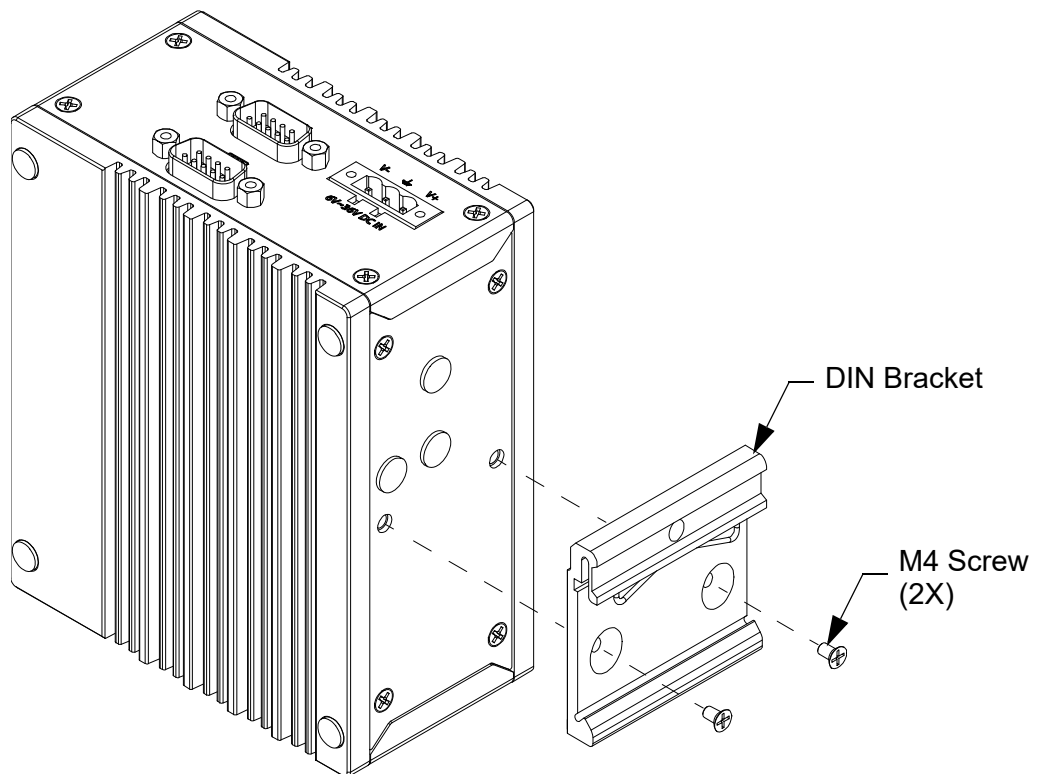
NC-E Node Controller DIN Rail Mounting
